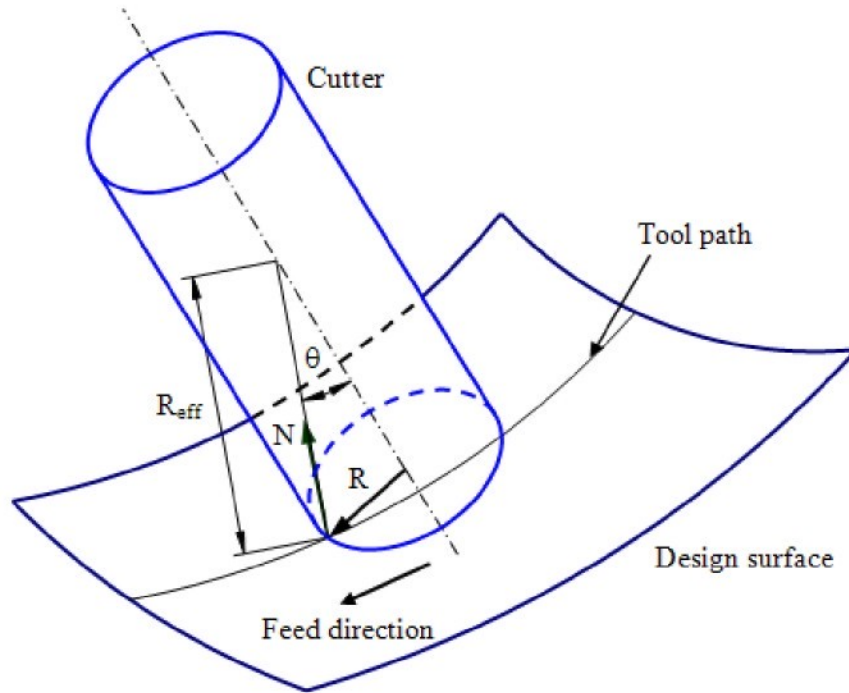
Effective radius of a flat-end cutter used for 5-axis surface machining.
